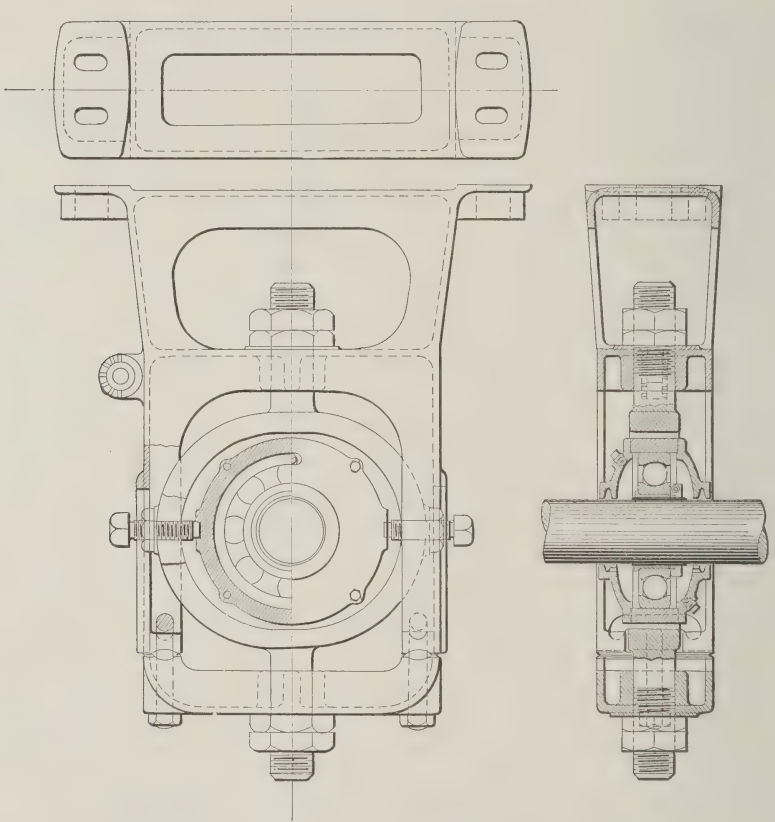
ARRANGEMENT OF BALL-BEARING HANGER
